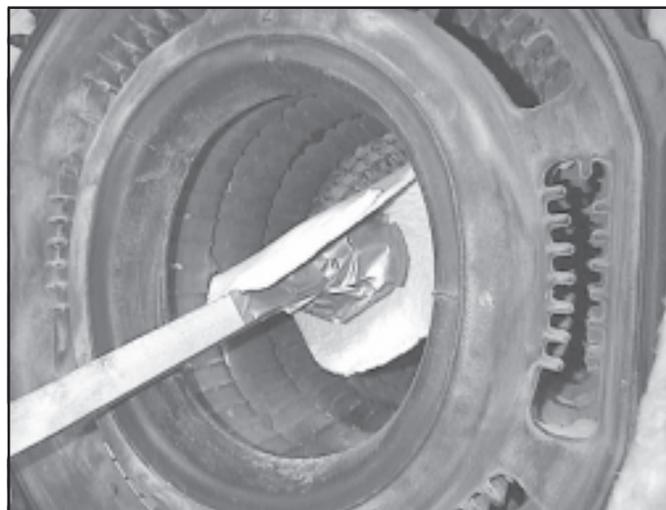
Working from the bottom up, mold the liner to the back plate.
